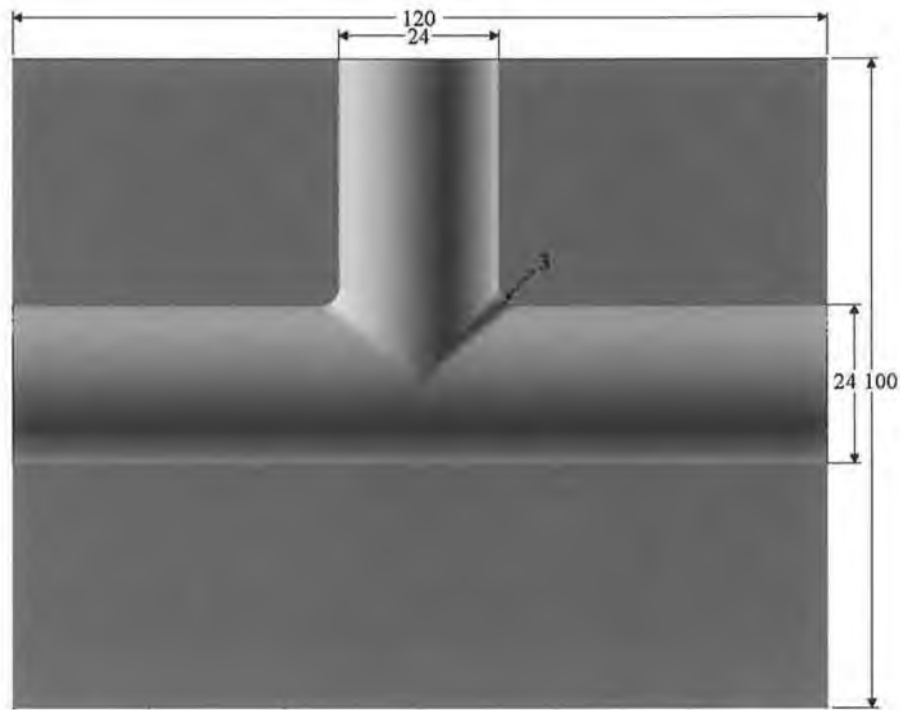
CAD model of T-branch die (all dimensions are in mm)
